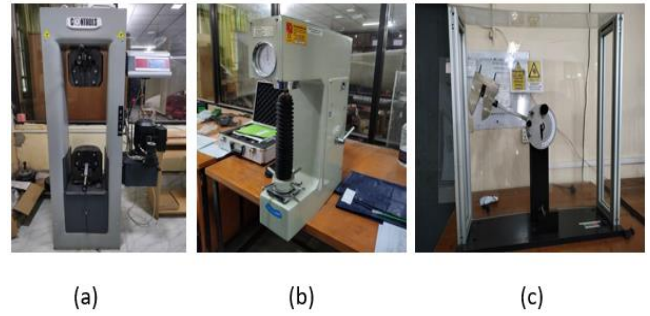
(a) Universal Testing Machine (b) Rockwell Hardness Testing Machine (c) Impact Testing Machine.
